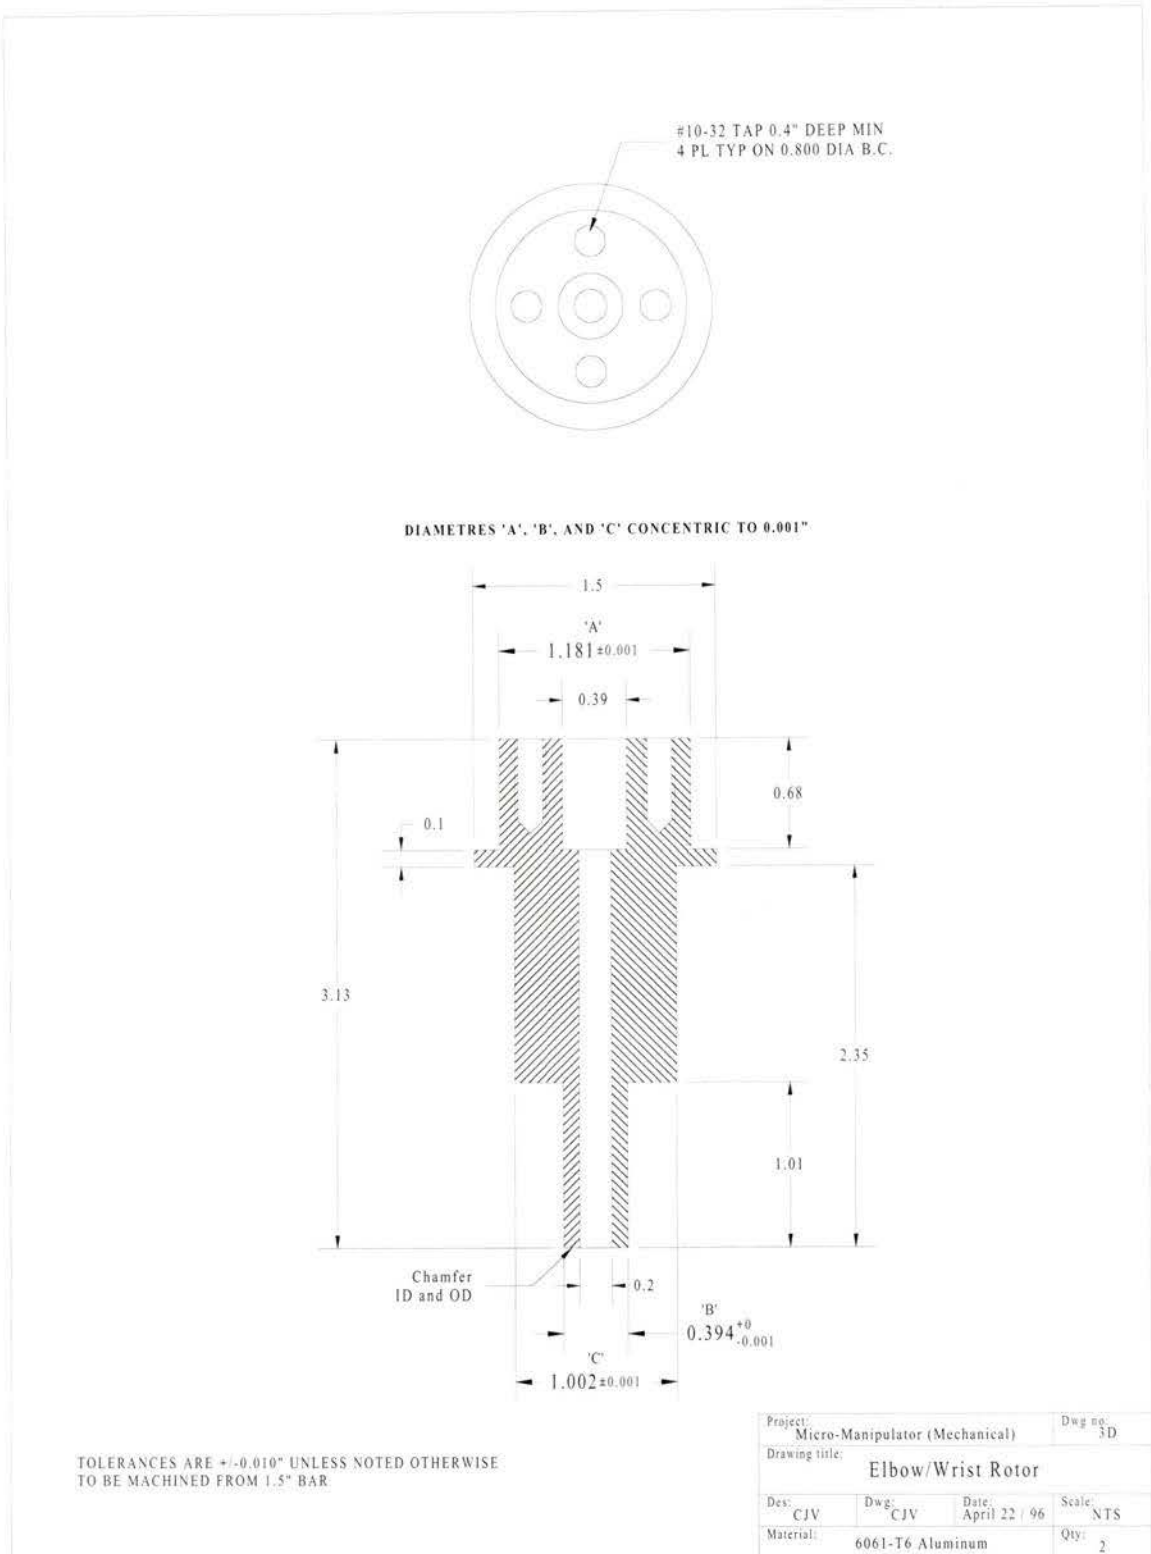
SARA Elbow/Wrist Joint: Rotor Shaft
